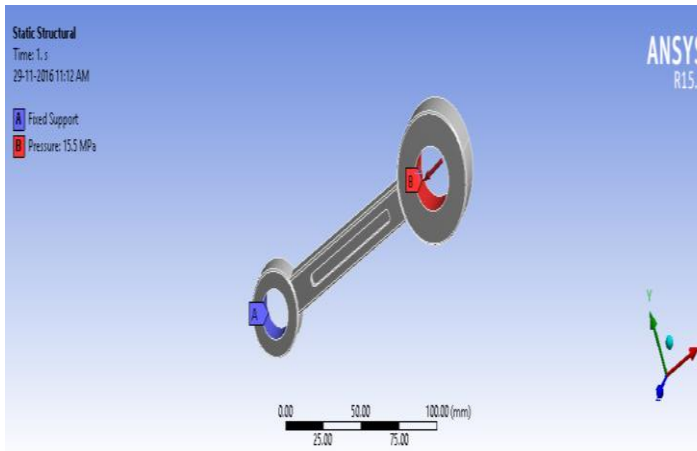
Boundary Conditions of Connecting Rod with I Beam
